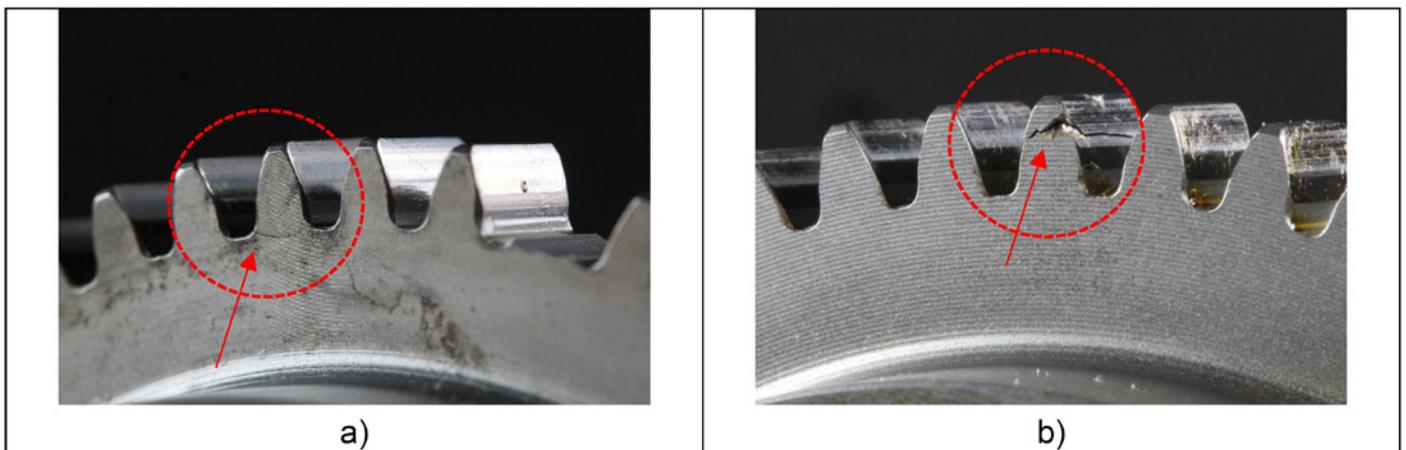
a) Example of a tooth root fracture with crack initiation at or below the surface in the tooth root fillet near the 30° tangent and b) example of a breakage at the tooth flank due to crack initiation at the tooth flank (observed only once each for variant S4 and S6).
